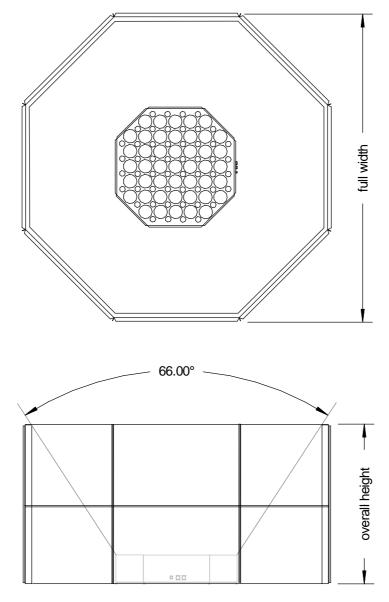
Outer dimensions of a freestanding enclosure (Example: XFAS)
